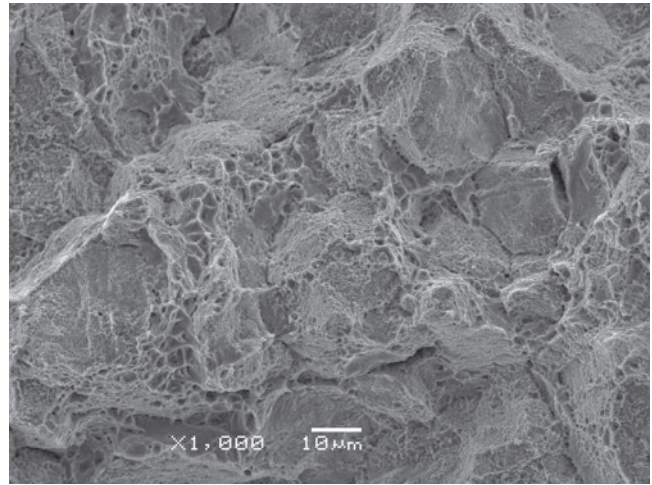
Intergranular fracture surface in another location of the sample
